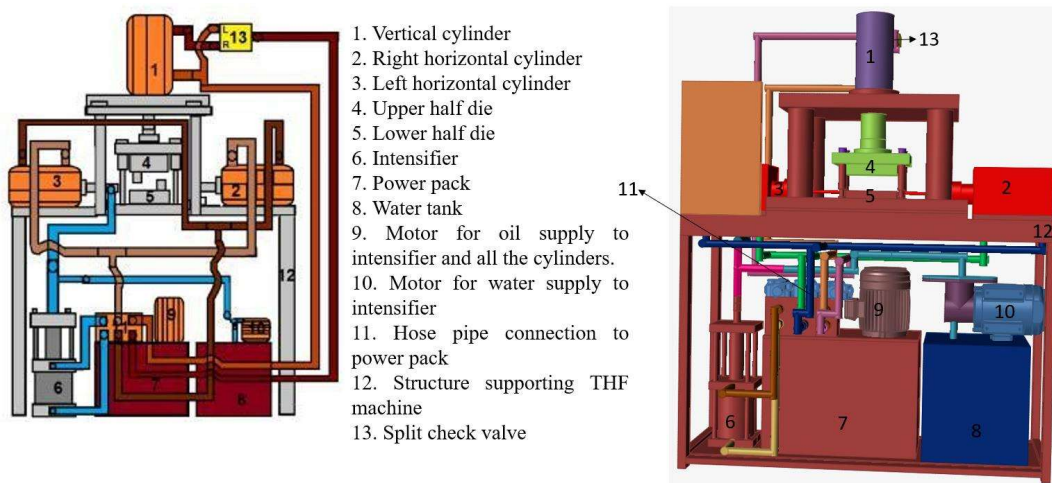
Tube Hydroforming machine hose pipe connections arrangements
